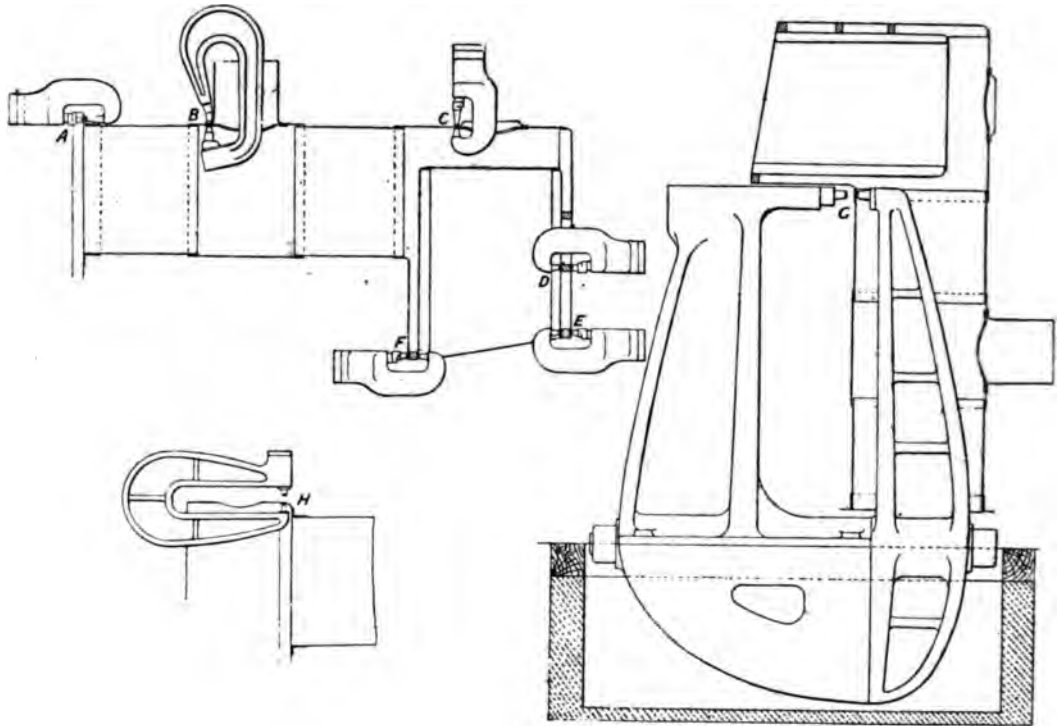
Hydraulic Riveting Applied to Locomotive Boilers.
